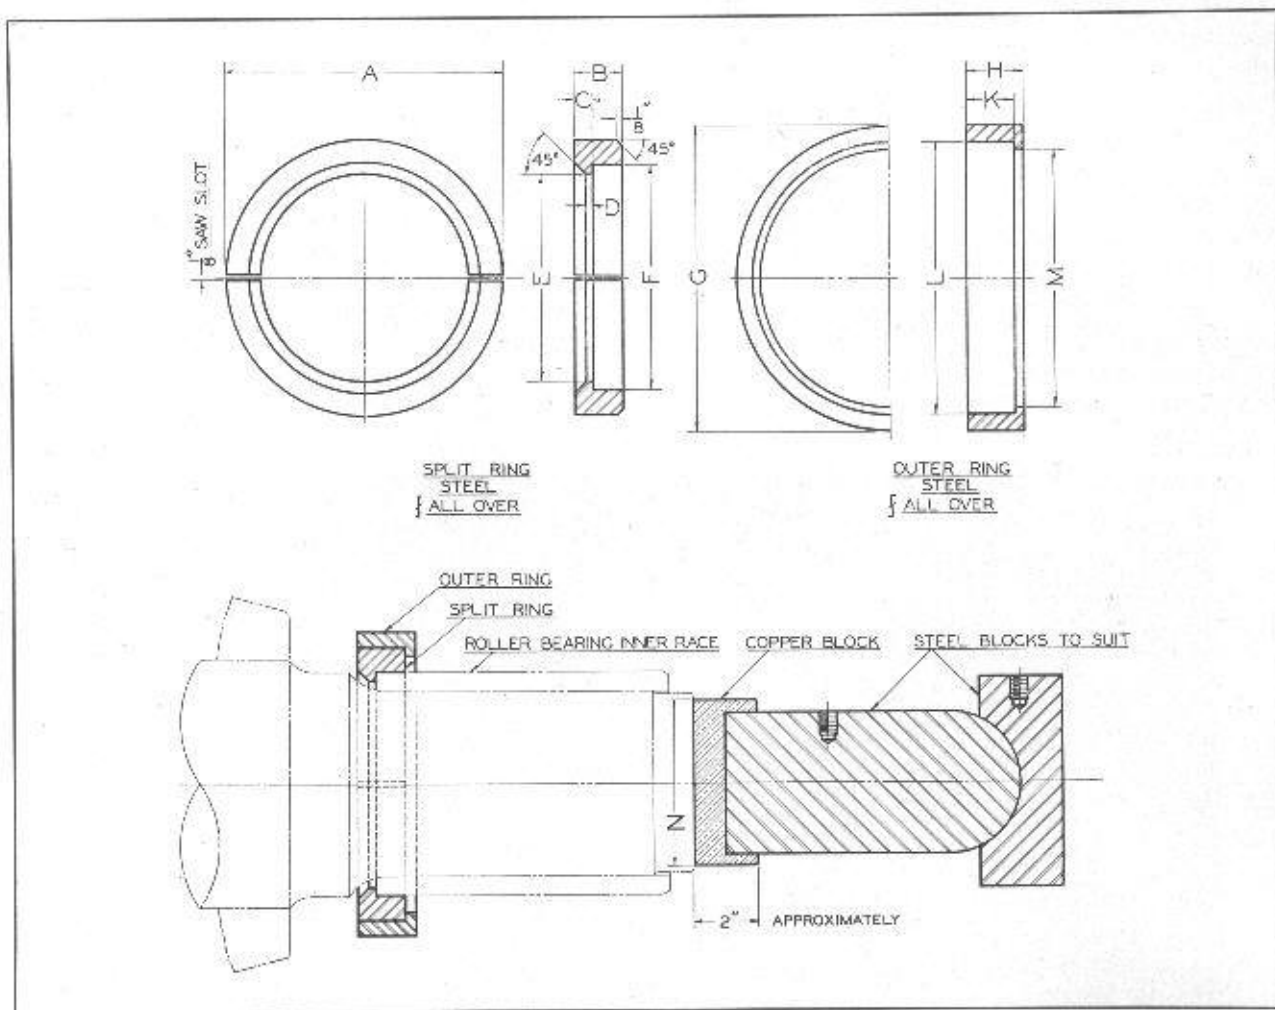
Detail of split ring for pressing inner races off the axles. The self-aligning pressure block insures uniform pressure over the end of the axle and prevents damage.
